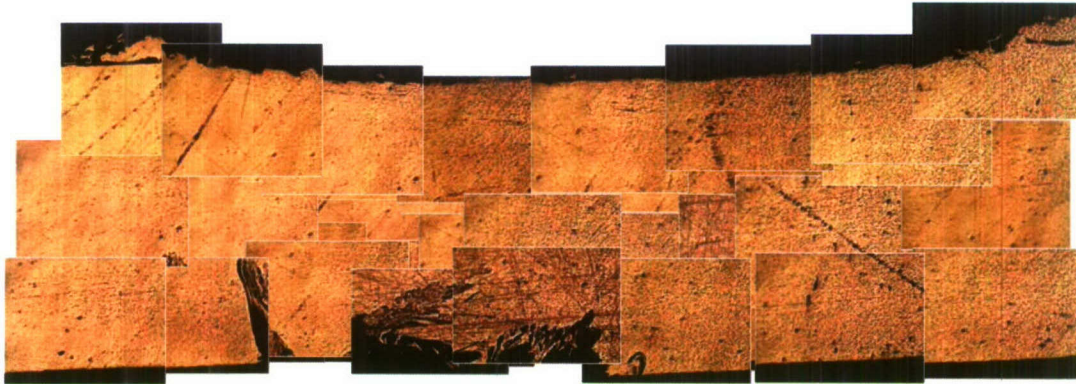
EAFSW weld cross-section of Al 5083 plate employing  $\frac{1}{2}$  in-diameter tool with conical tip at ~900 rpm. Scale: ~20X
